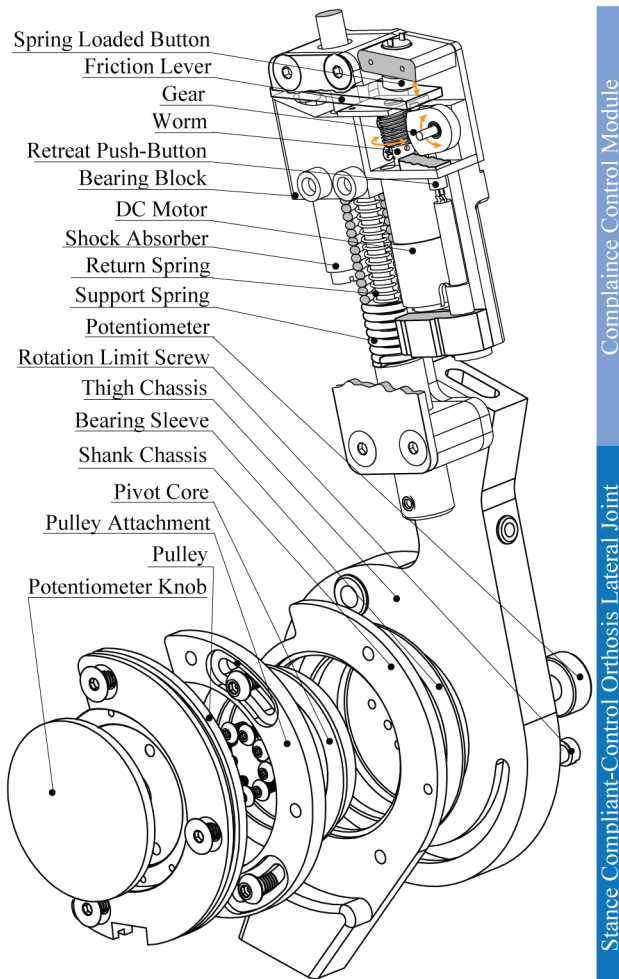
Compliant stance control module is mainly composed of the CCM and the lateral joint of the stance control orthosis. CCM is mounted on the thigh chassis and harnesses the shank chassis using a tendon that is wrapped around the pulley. CCM engages the support spring during the weight acceptance phase (or the entire stance phase, depending on the user's gait requirements) to stabilize an affected knee, and disengages it during the rest of the gait to allow for free progression of the limb.
